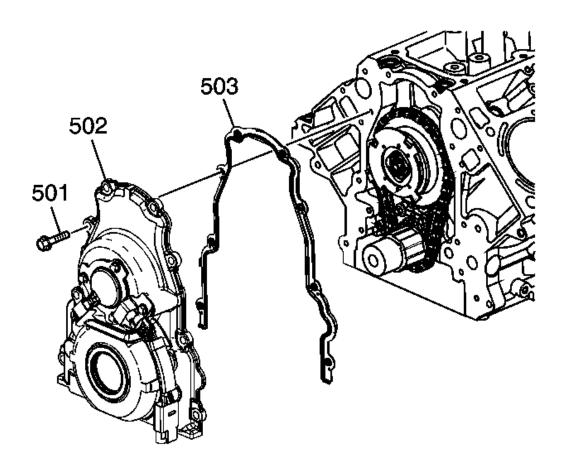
View Of Front Cover, Bolts & Gasket Courtesy of GENERAL MOTORS CORP.
